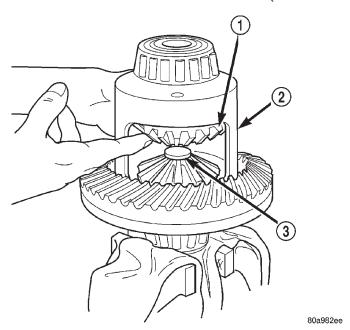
Upper Side Gear & Clutch Disc Pack Installation
